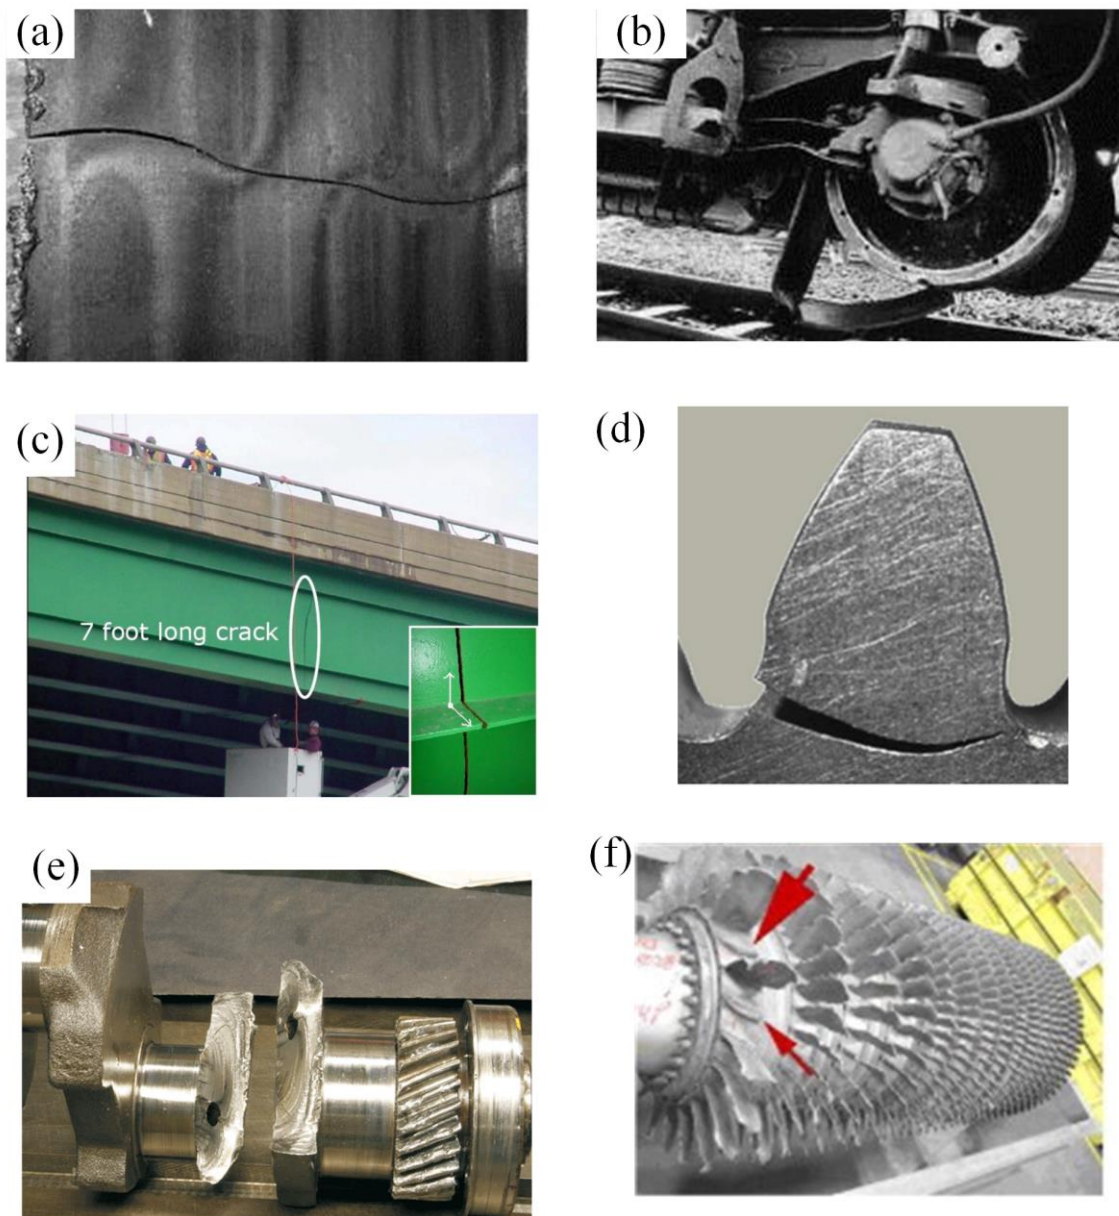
Examples of fractures caused by mixed mode fatigue loading. (a) Curved crack path at the back side of a structure of an agricultural machine [6]. (b) Broken wheel tyre of a railway wheel [6]. (c) Fatigue cracking in a bridge girder starting from weld defects [7]. (d) Curved crack path in tooth root breakage in gear (<https://tinyurl.com/fatigue-gear>). (e) Failure of crankshaft under bending and torsion loading (<https://tinyurl.com/fatigue-crankshaft>). (f) Fatigue failure of gas turbine blades under extreme loading conditions (<https://tinyurl.com/fatigue-turbine>).
